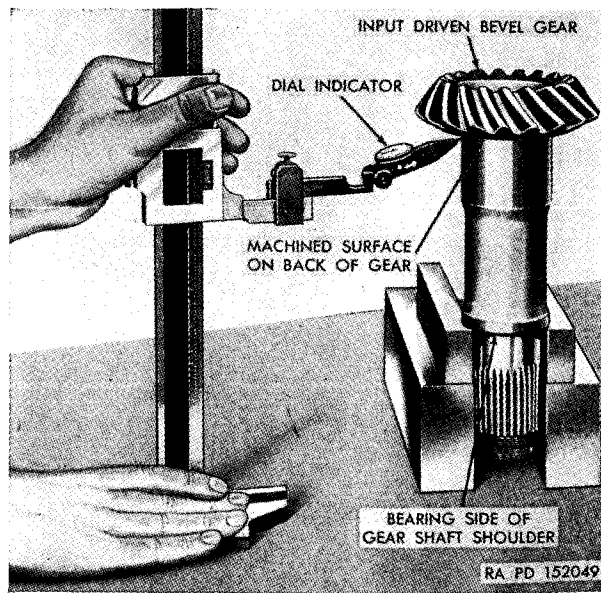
Measuring from shaft bearing shoulder to back of input-driven bevel gear.
